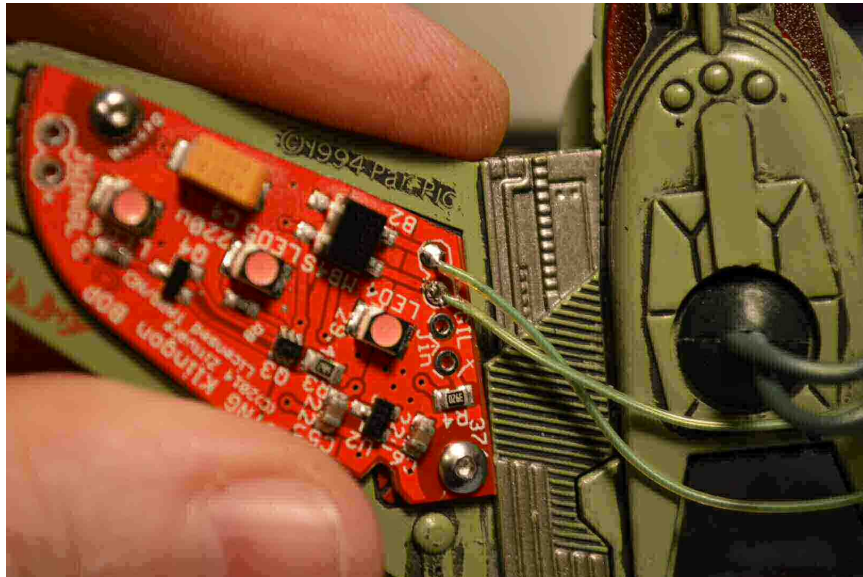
J<sub>G1</sub> Jumper Left-Wing PCB
